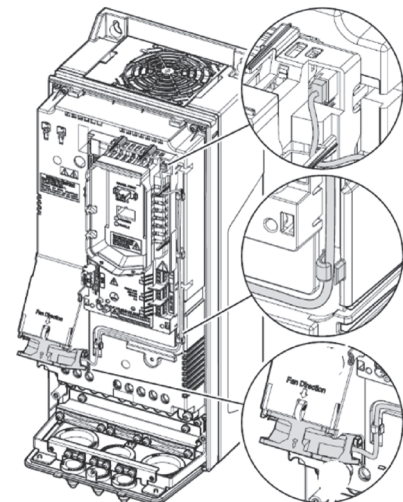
Fig. K – Remove Auxiliary Fan (Frame Sizes R3)
